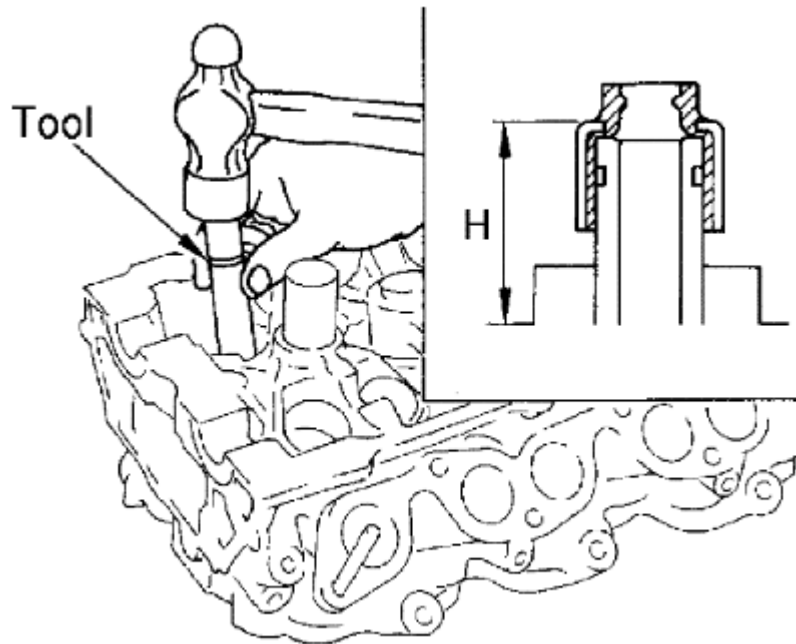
Pressing Valve Oil Seal To Specified Height (H) Using Tool
